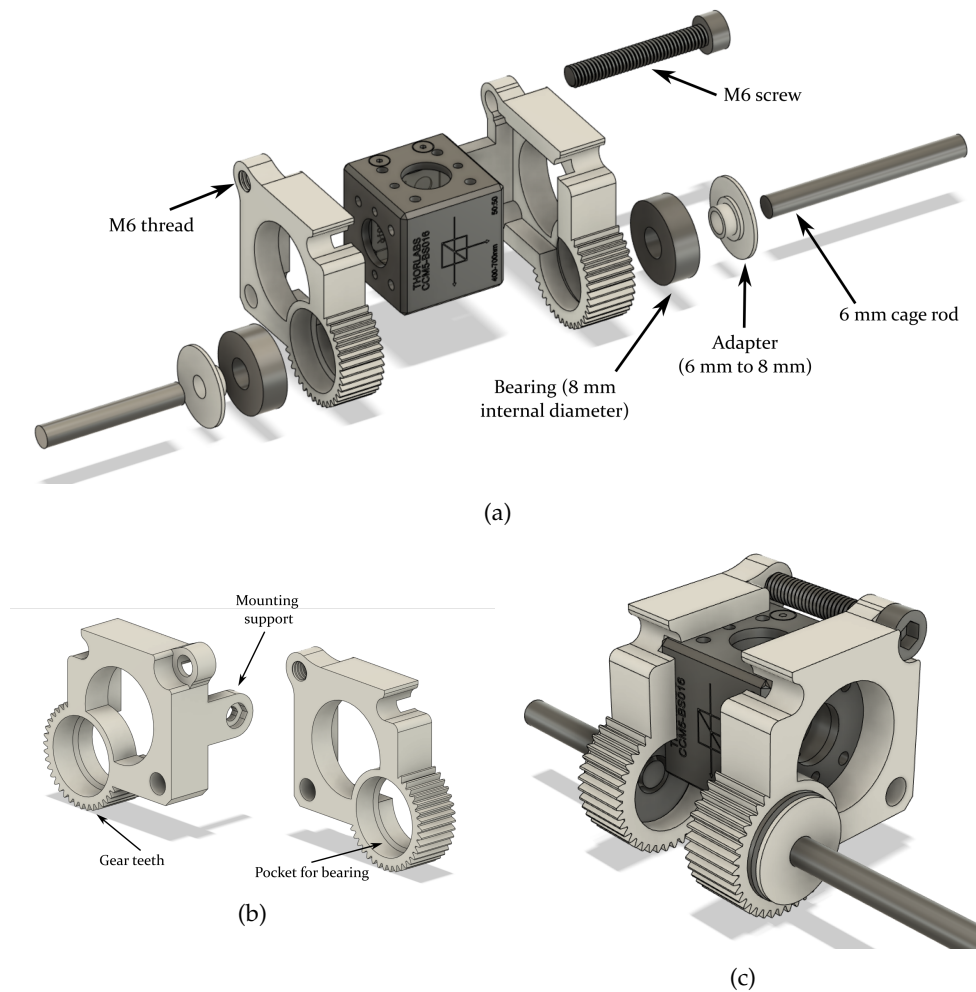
CAD drawings of the current swing-adapter version. (a) Exploded view and labels of each part. (b) Individual views of the two half-adapters, showing the bearing pockets. (c) Assembled view of (a).
